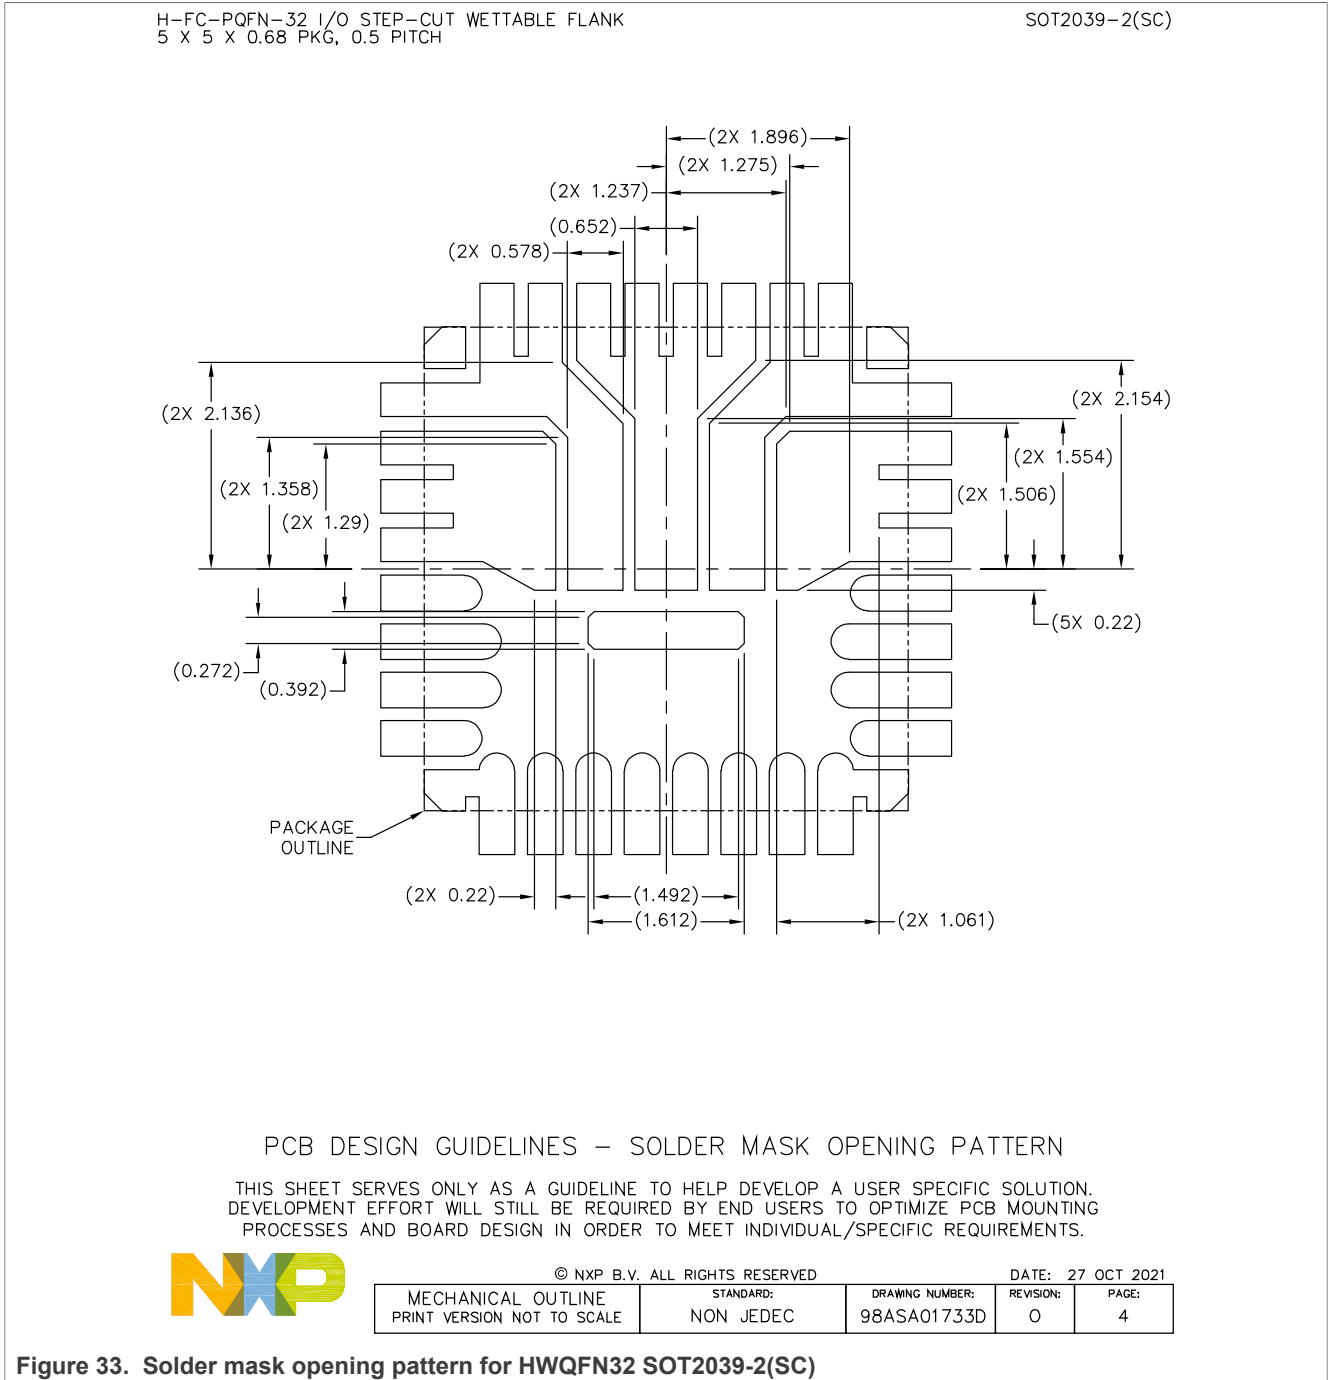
Solder mask opening pattern for HWQFN32 SOT2039-2(SC)
